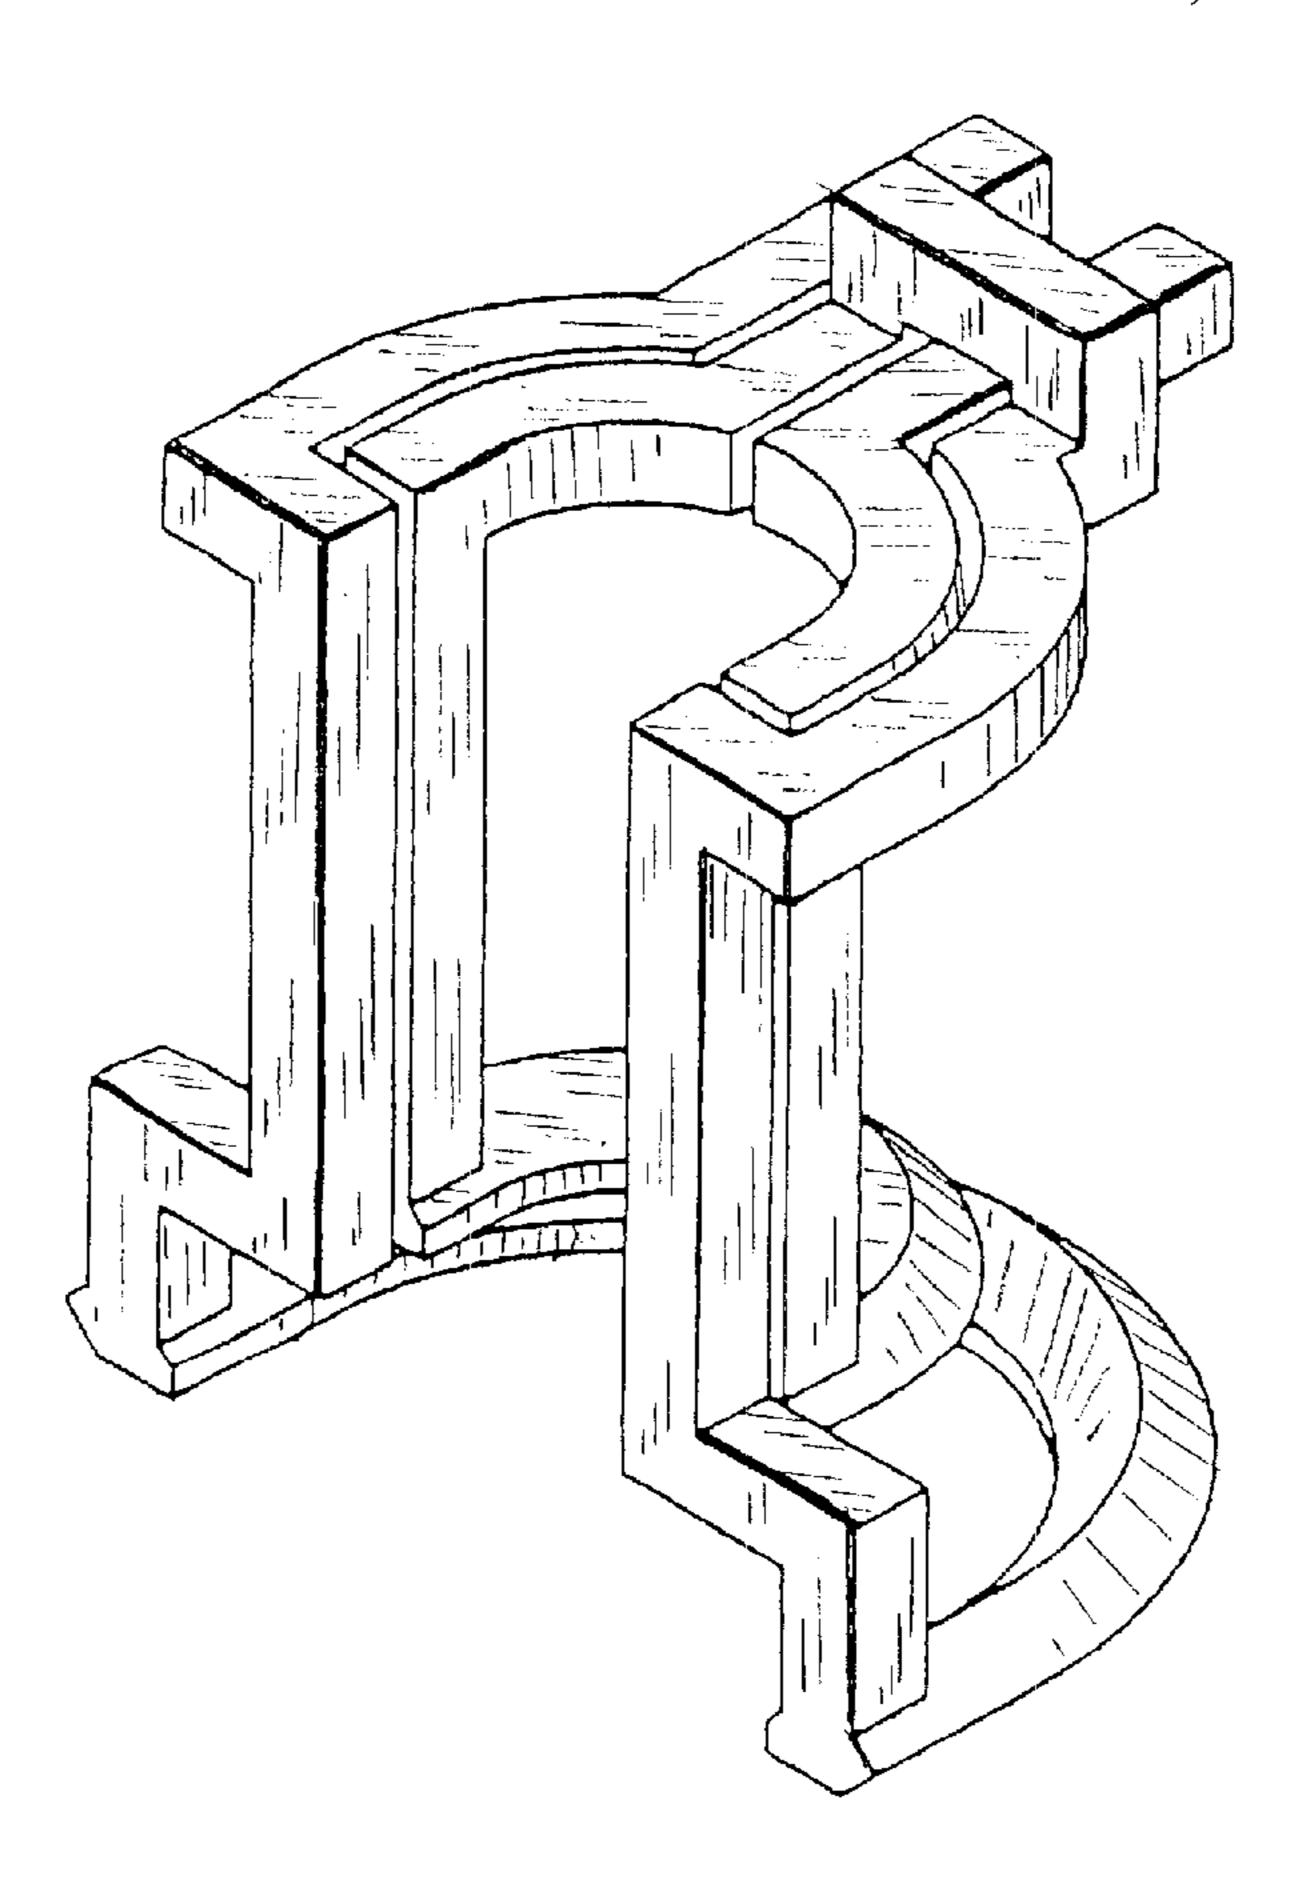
is a sectional view taken on line A—A in FIG. 3.
